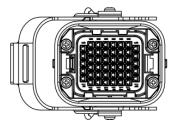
Dimensions of heavy-duty connectors on the cabinet side
